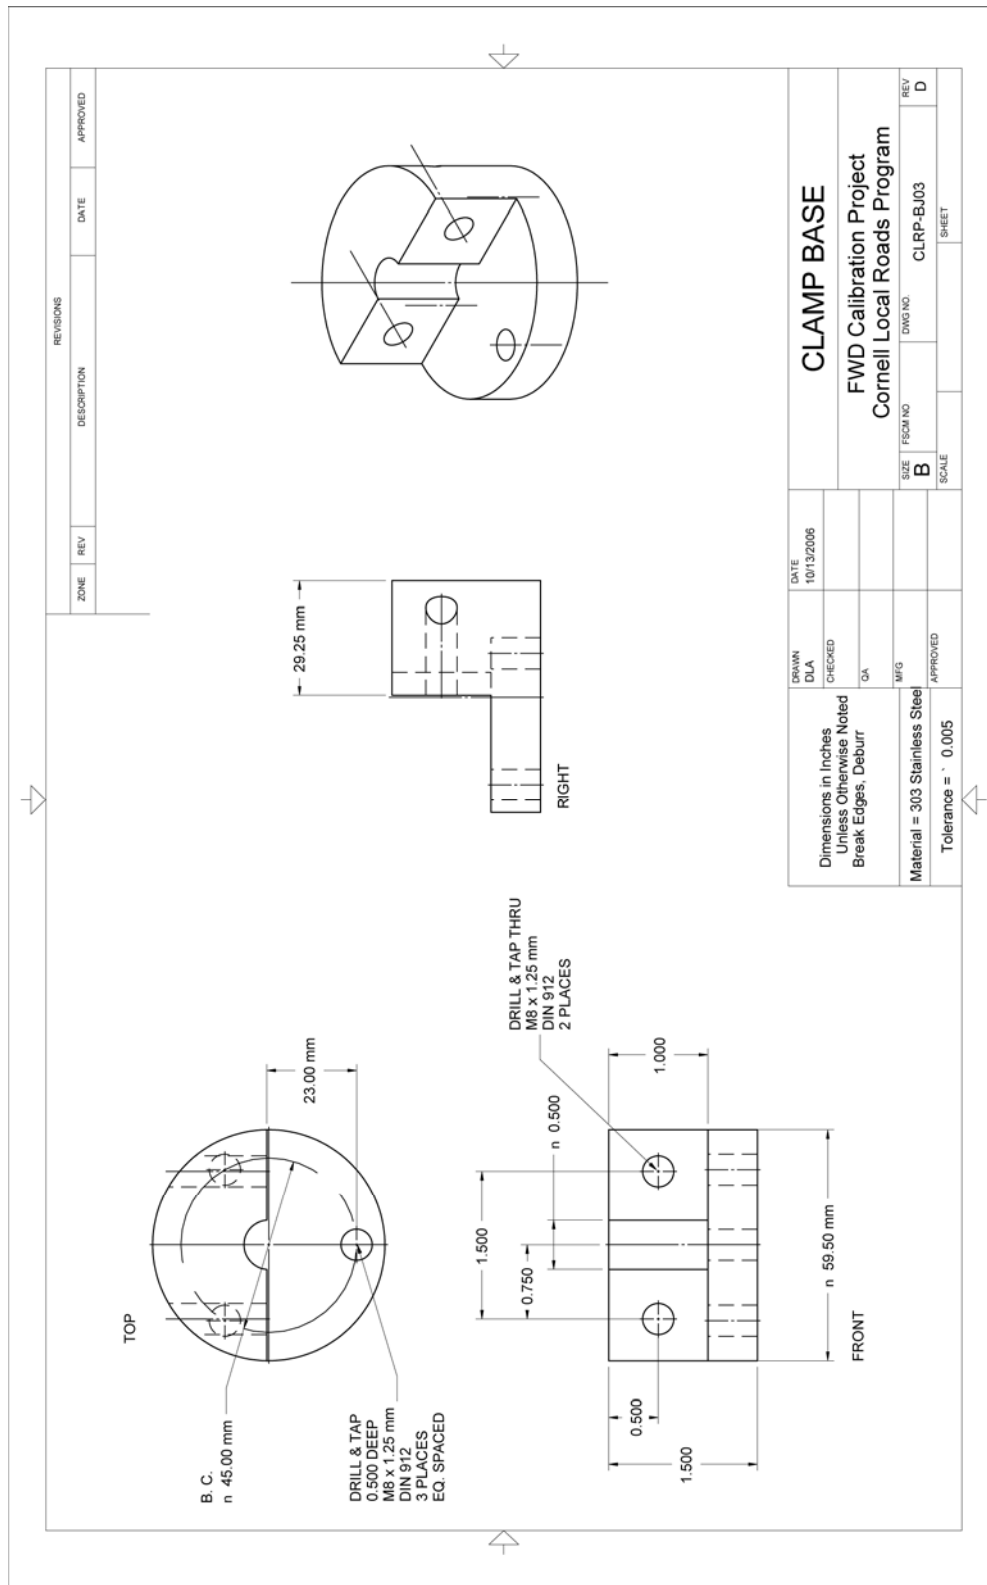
Drawing. CLRP-BJ03 Clamp Base.
